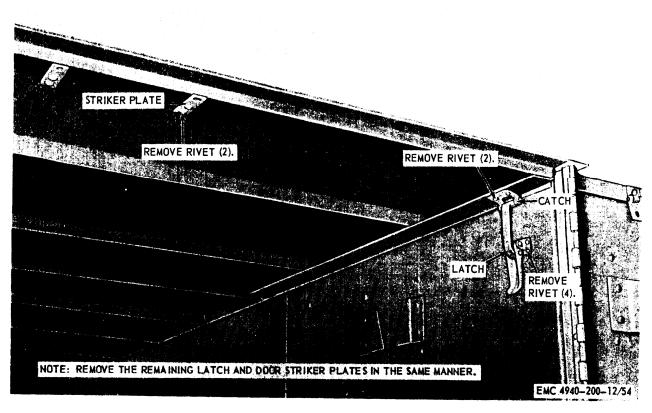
Hinged roof panel latch and door striker plates, removal and installation.
